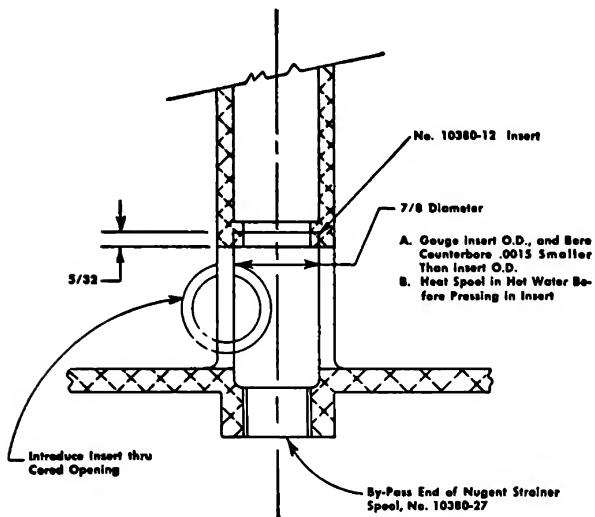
By-pass valve seat insert—Nugent Strainer
